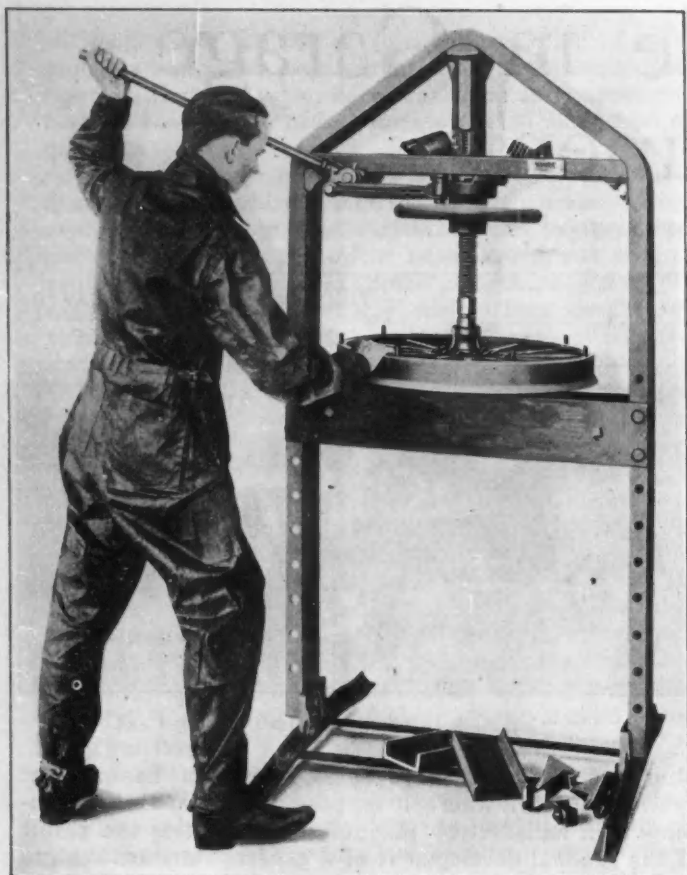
PORTABLE PRESS OF THE SCREW TYPE FOR STRAIGHTENING BENT PARTS
